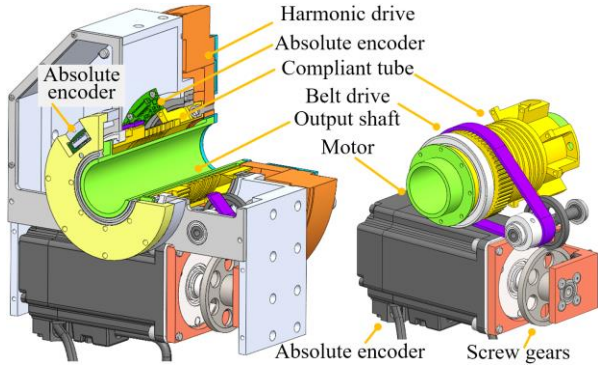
(a) Cutaway view and (b) transmission components of the robotic actuator
